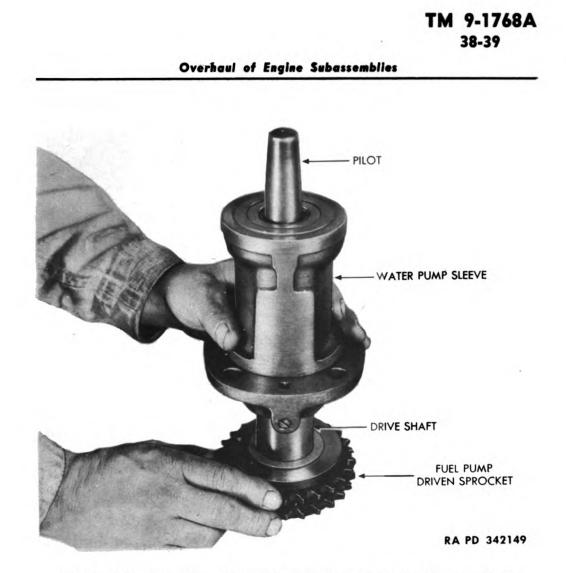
Inserting Fuel Pump Drive Shaft in Sleeve, Using Special Pilot (41-P-405)
